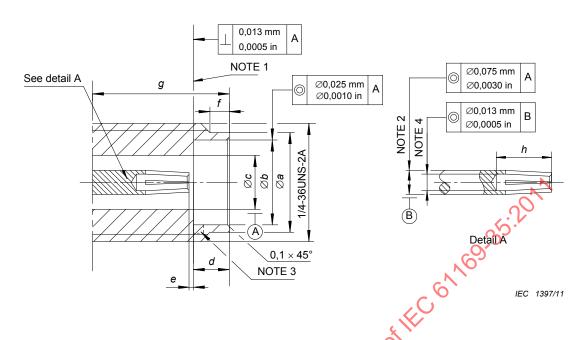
Connector with socket-centre contact (for dimensions and notes, see Table 5)
